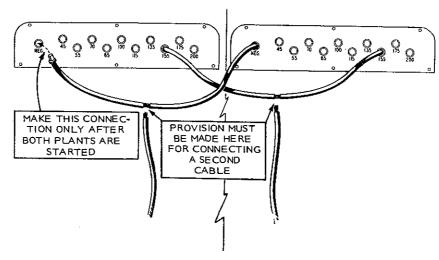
WIRING CONNECTIONS FOR WELDING IN PARALLEL
